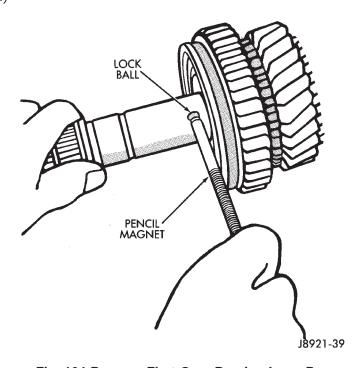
Remove First Gear Bearing Inner Race Lock Ball
